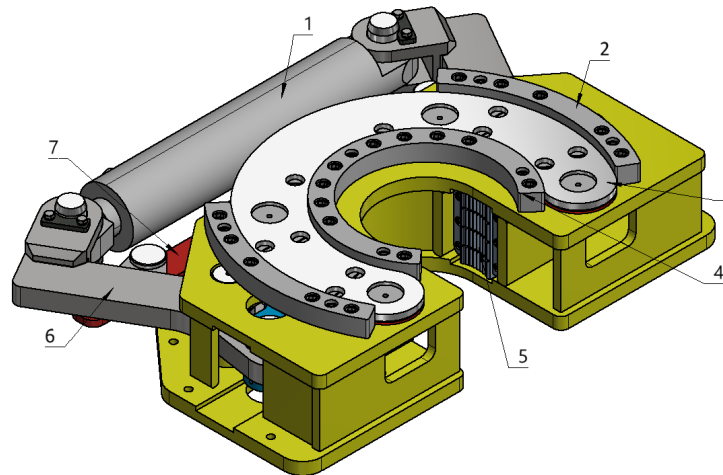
Schematic diagram of the structure of the lower clamp body.1.Clamping cylinder;2.Outer retaining ring;3.Wear-resistant seat plate;4.Inner retaining ring;5.Clamping clamp;6.clamping arm;7.limit plate.
